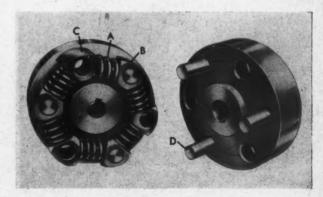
A view of the two halves of a Cardeflex coupling, showing the springs and driving pins
